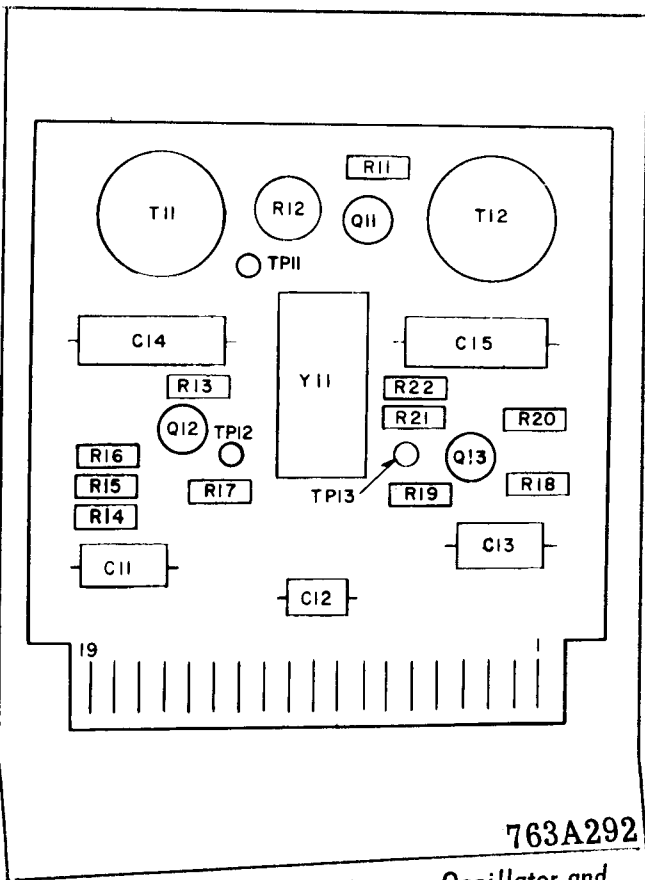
Component Locations on Oscillator and Mixer Printed Circuit Board.
